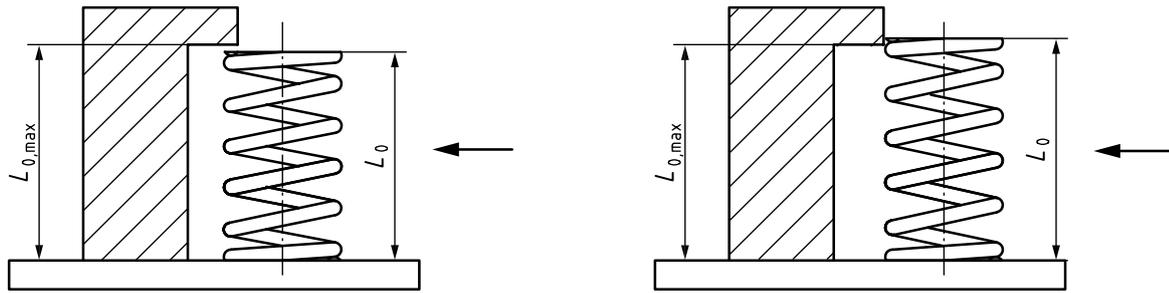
Method of measurement of the free length ( $L_0$ ) with calliper (example)
